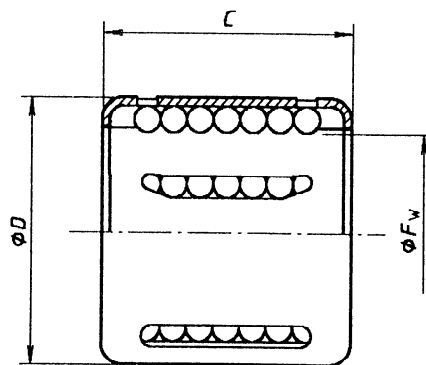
Symbols for boundary dimensions — Bearing without snap ring grooves (mainly series 1 and 2)
